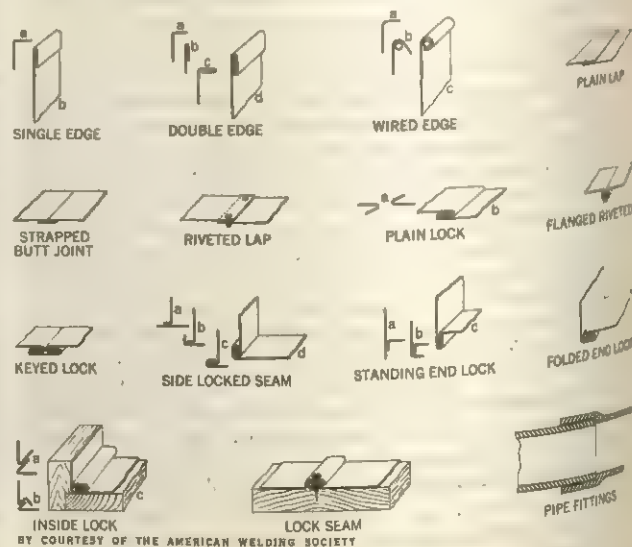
TYPICAL SOLDER JOINT DESIGNS
